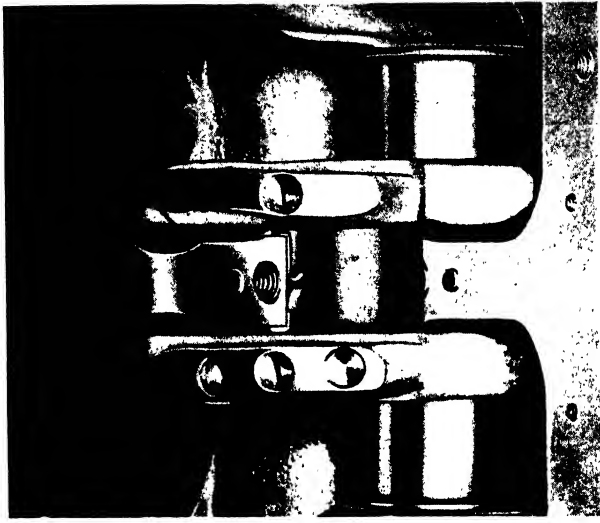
REMOVING A THIN-SHELL MAIN BEARING
